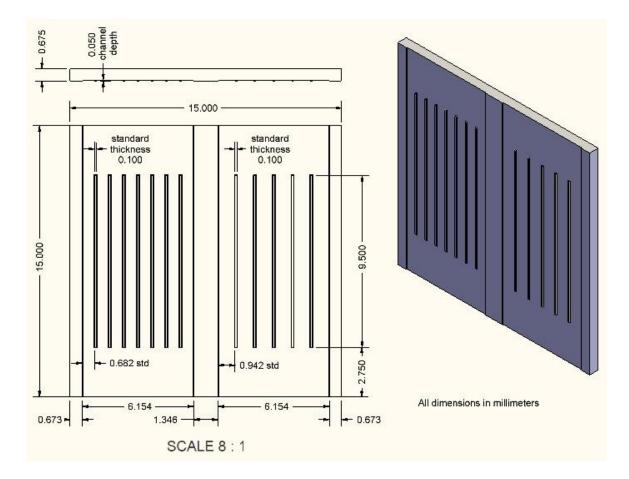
CAD drawing of the device fabricated at the Georgia Tech cleanroom
